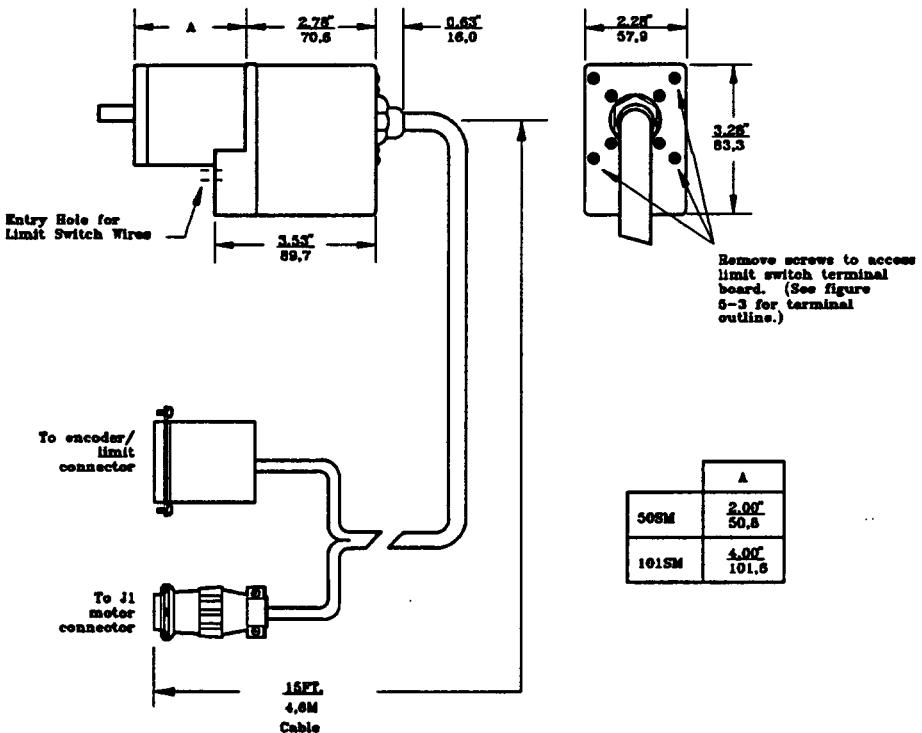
Mechanical Dimensions for Unidex 11 Stepping Motors
